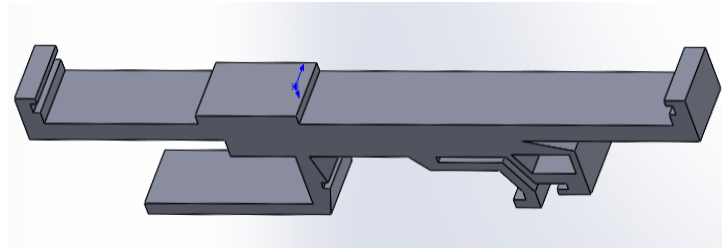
SolidWorks model of basic DIN rail mount for client PCB.
